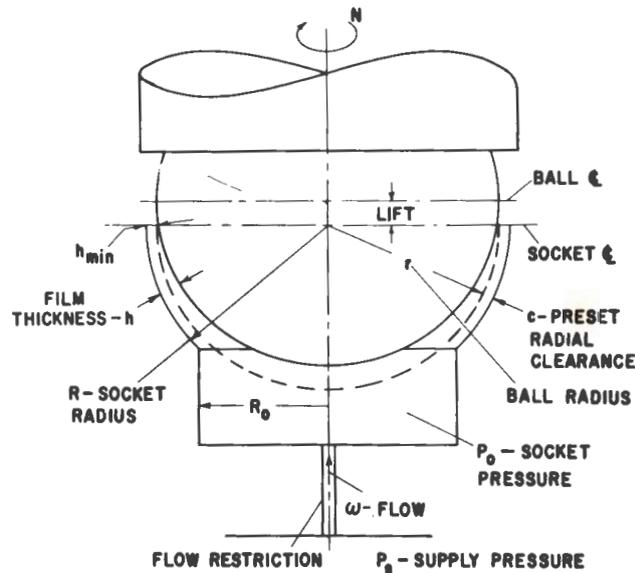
HYDROSPHERE BEARING ASSEMBLY
